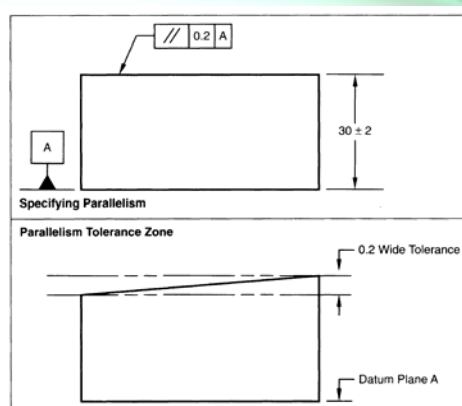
Parallelism tolerance applied to a surface
